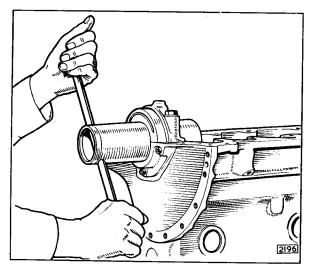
Sizing the rear oil seal using the special tool (Churchill Tool No. J.17.).
